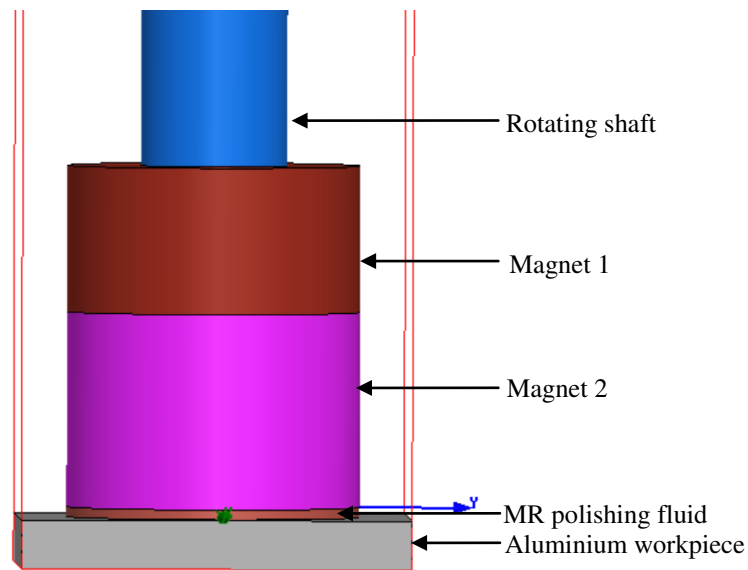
Magnetic model of permanent magnets finishing tool along with MR polishing fluid and aluminium workpiece.
